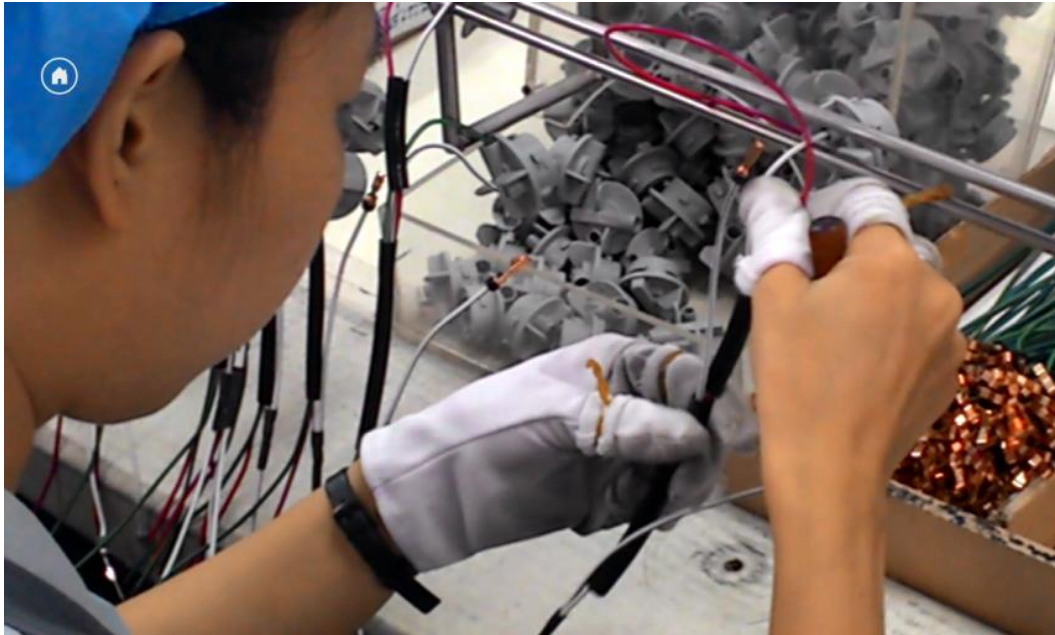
Assemble R/L with Tube 85 and Tube 40
